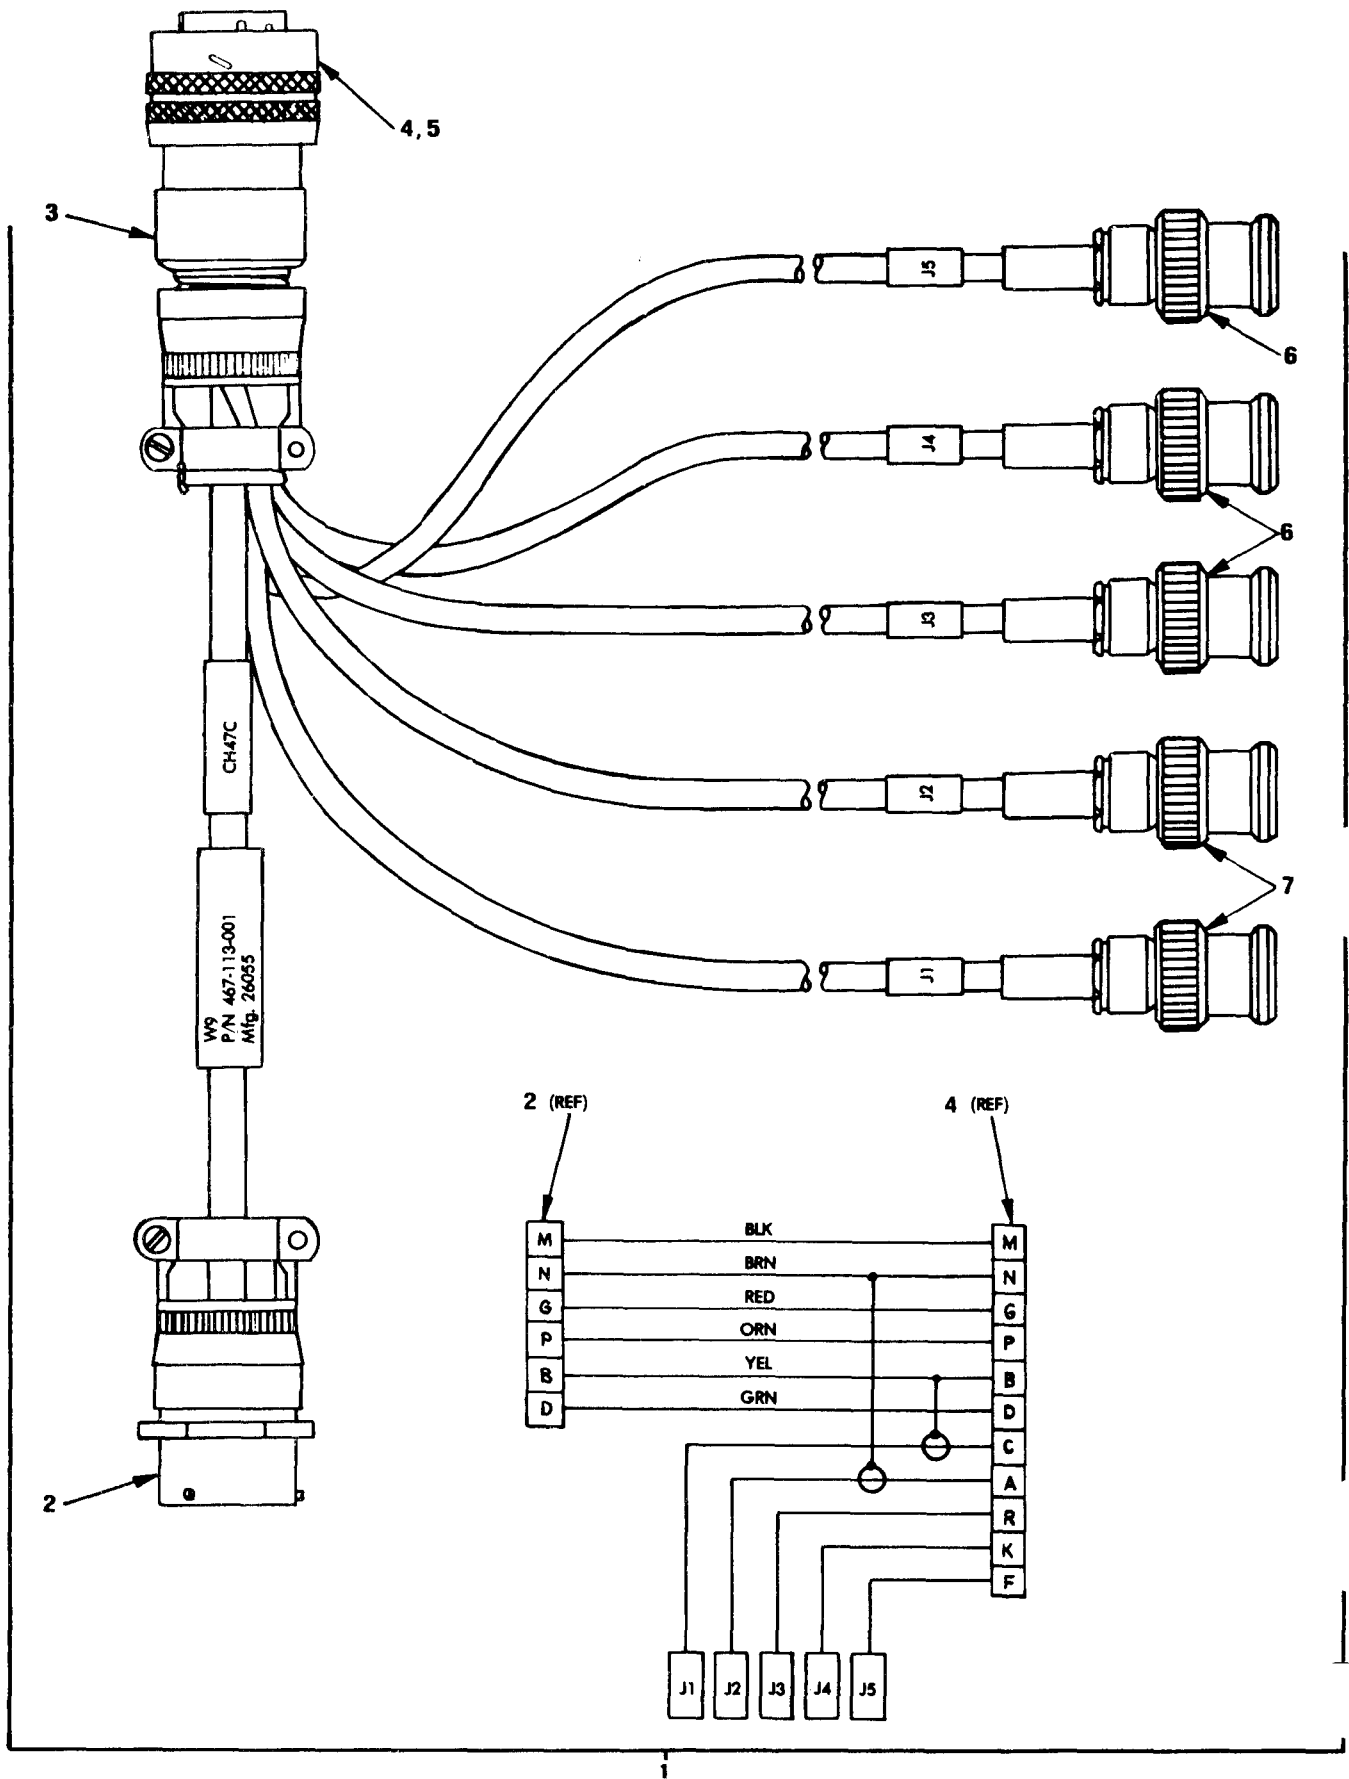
Adapter Cable Assembly W9 (467-113-001)
